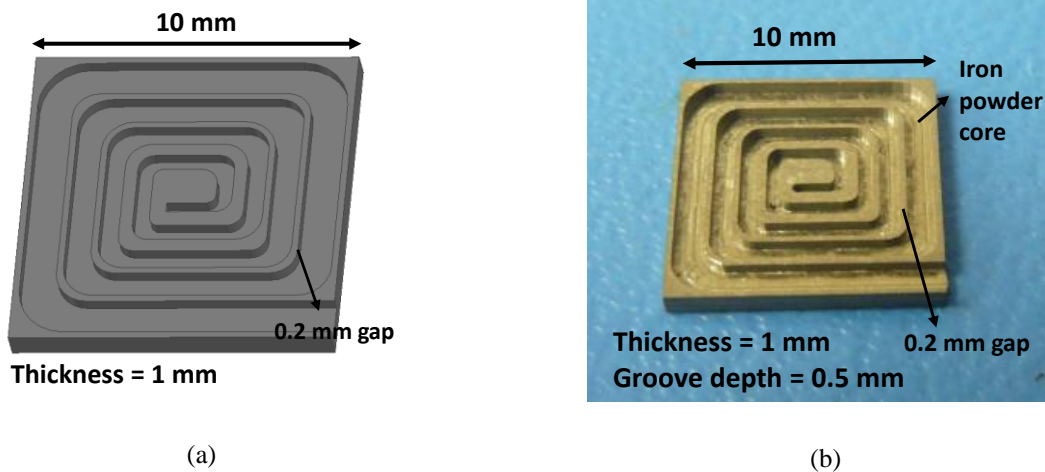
(a) Drawing of designed core structure obtained by FEA simulation software with dimensions listed in Table V; (b) core prototype made by routing process using Micrometals No. -8 plain core with 10 mm × 10 mm footprint and 1 mm thickness.
